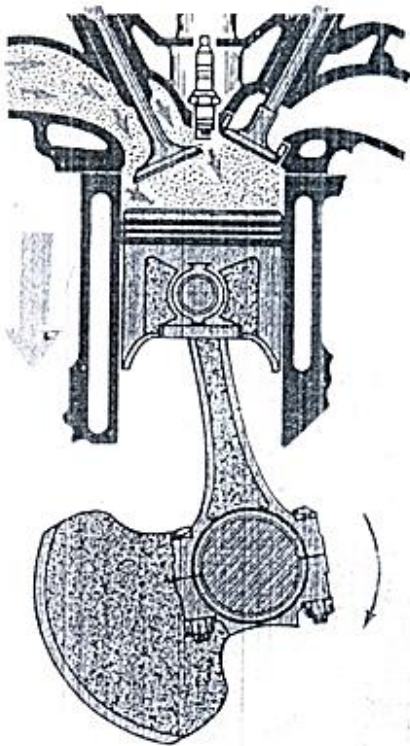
Intake stroke. The intake valve (at left) has opened. The piston is moving downward, drawing in a mixture of air and gasoline vapor into the cylinder.
